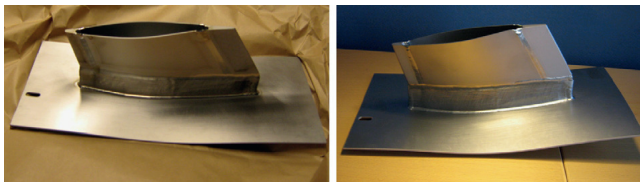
Sub-component welded and released from the fixture (left) and after heat treatment (right).
